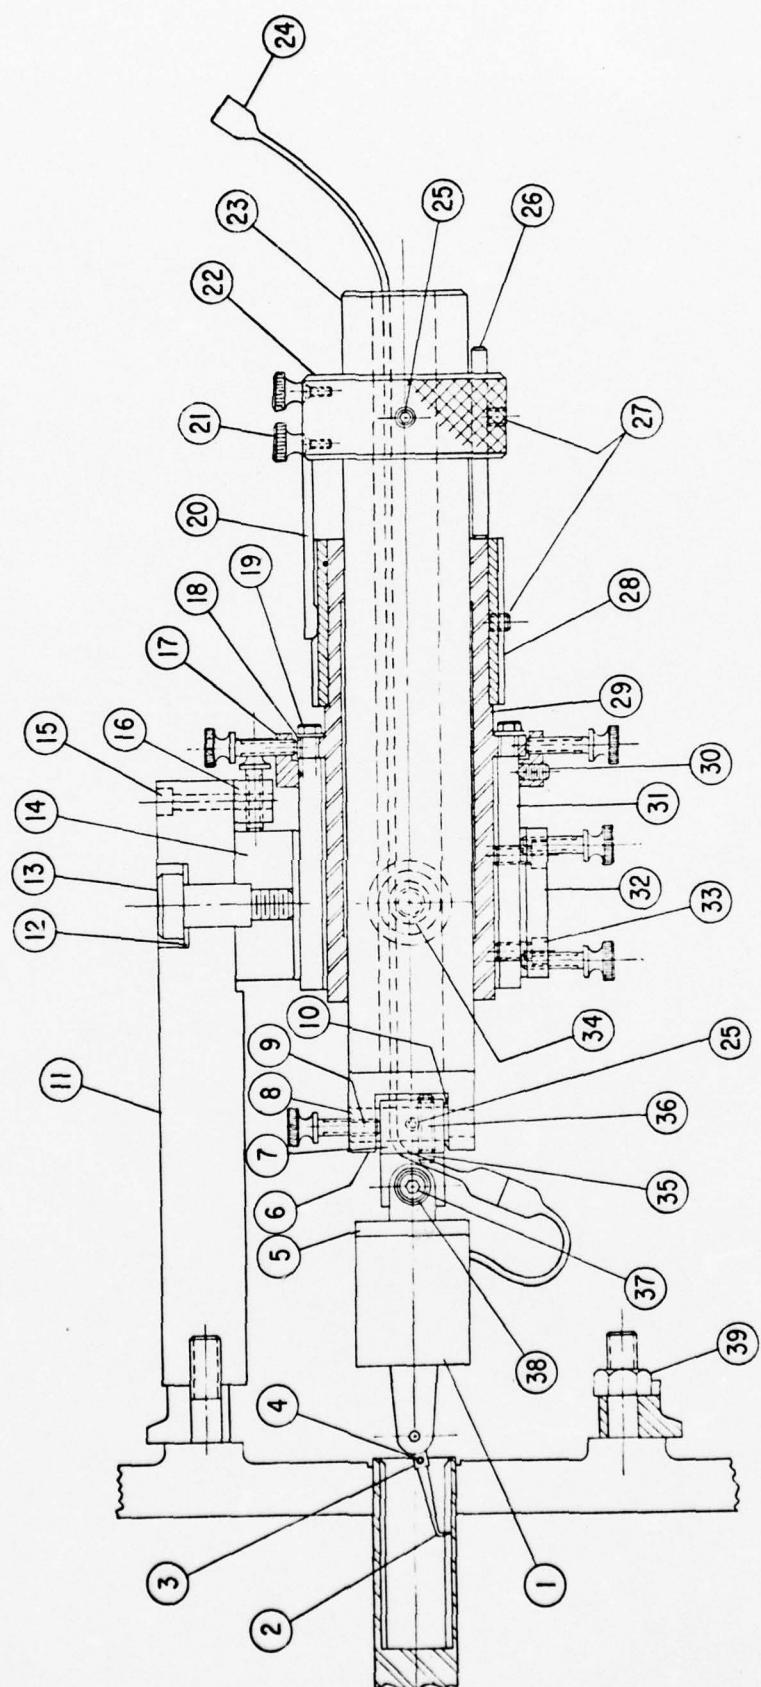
PARTS CALL OUT FOR GEARBOX SPLINE
